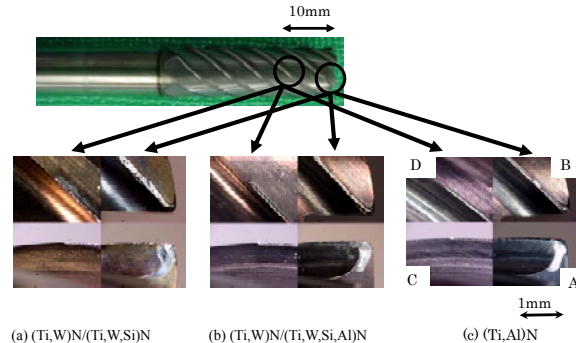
Tool wear at a cutting speed of 3.33 m/s and a cutting length of 36.4 m
